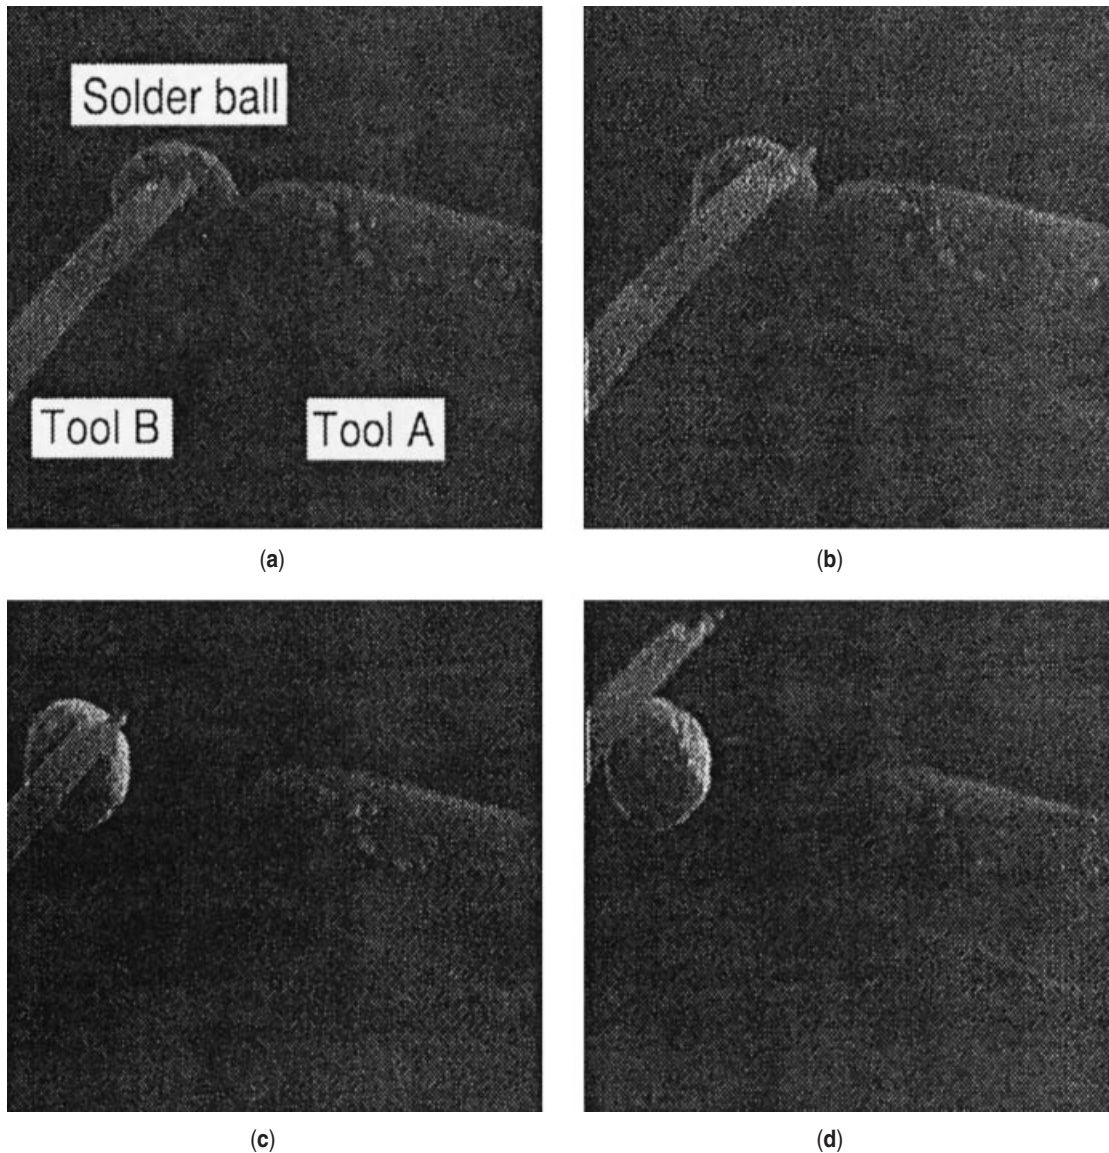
Placing a solder ball by holding the object still: (a) placing the object with Tool A; (b) Holding the object with Tool B; (c) Removing Tool A from the object; (d) Removing Tool B from the object.
